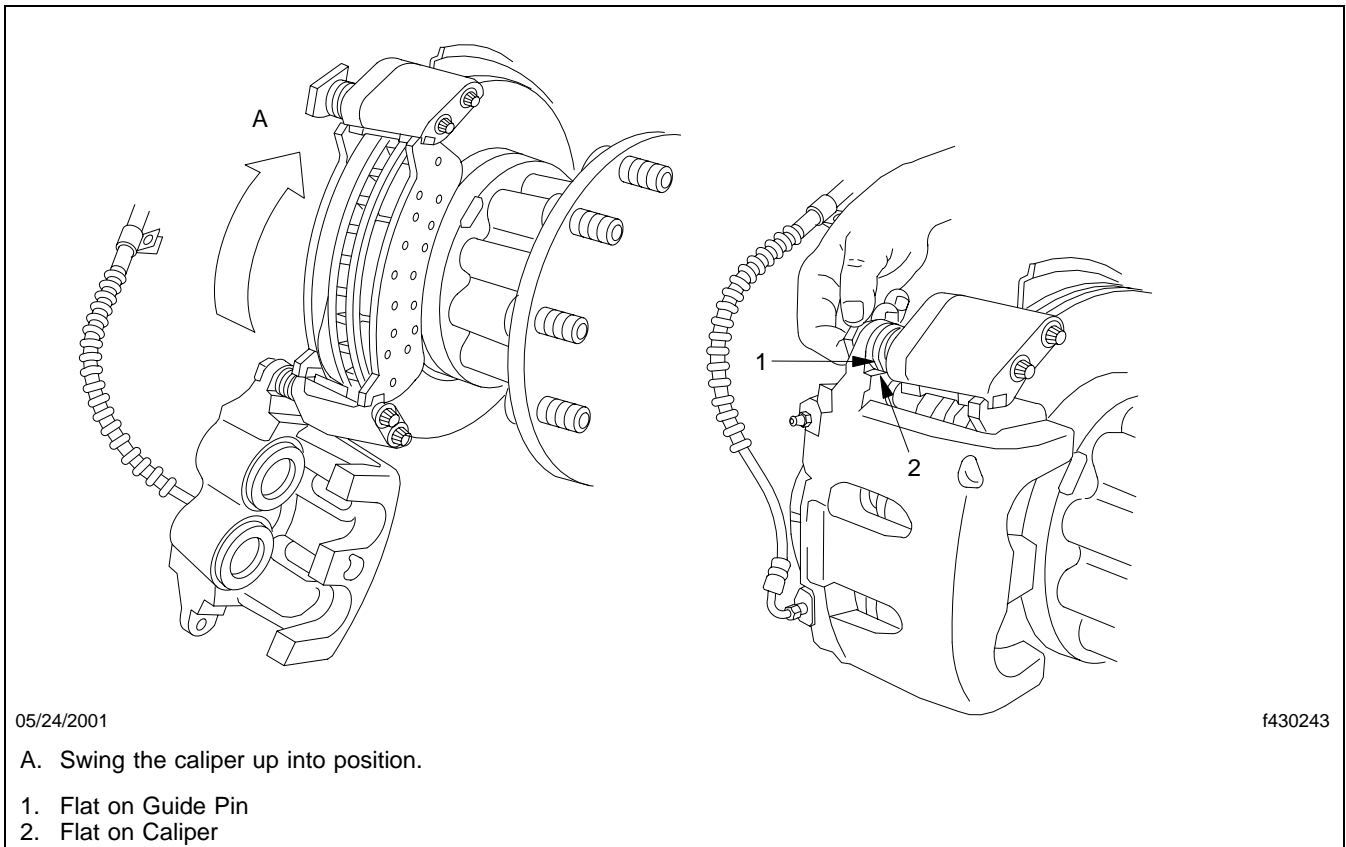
, Rotating the Caliper Over the Brake Pads and Rotor
